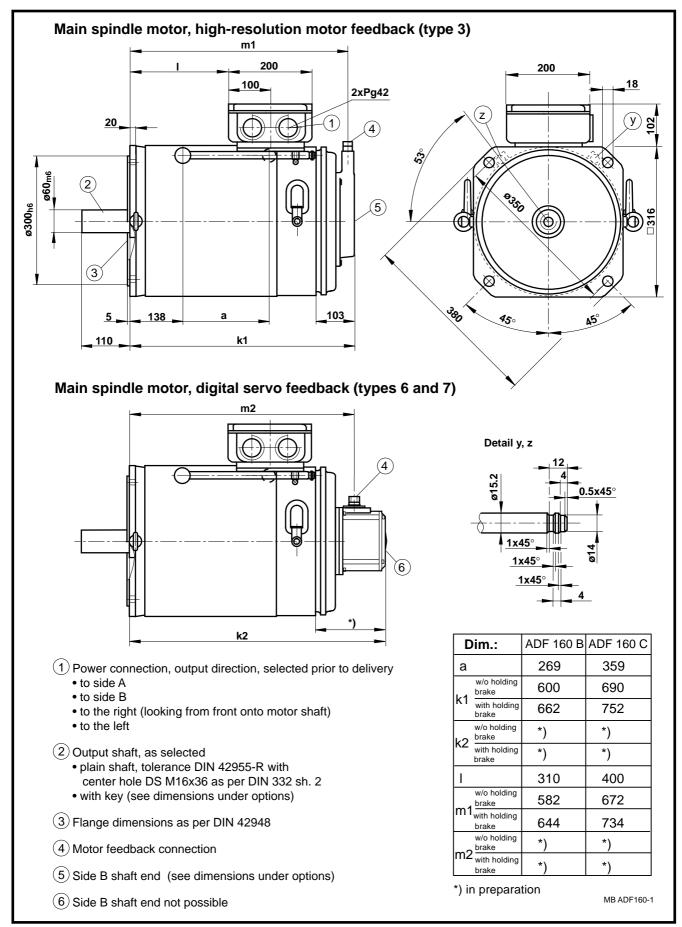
Main spindle motor ADF 160 - dimensional data
